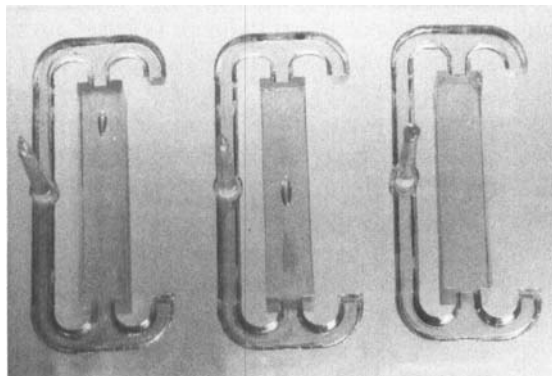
Izod bar mouldings with sprue and runner still attached. Left hand moulding contains a void near one of the ejector pins (common fault). Centre moulding contains a void near its centre. Right hand moulding is flaw-free.
